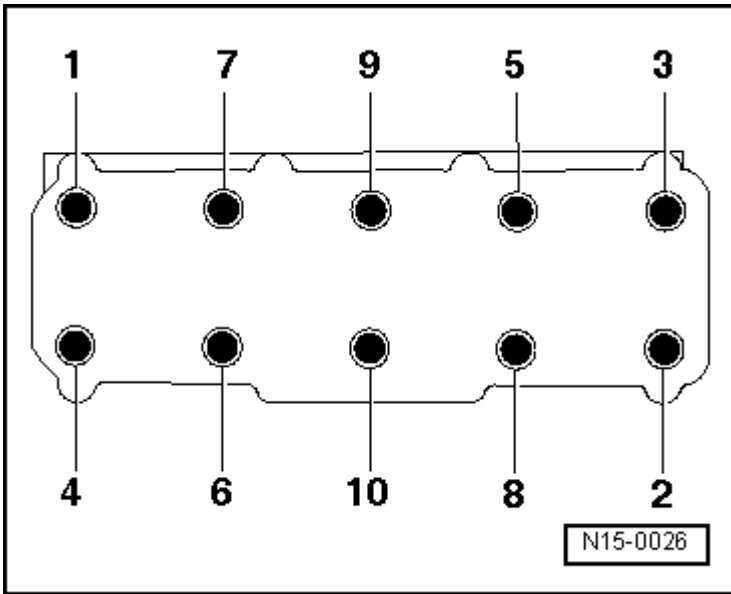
Identifying Cylinder Head Bolts Loosening Sequence
